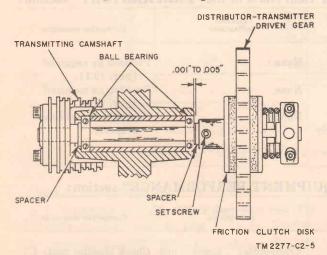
(Added) Transmitting camshaft end play adjustment. c. Adjustment. Loosen the setscrews in the friction clutch disk. While holding the transmitter camshaft towards the casting and against the ball bearing, slide the friction clutch disk and spacer against the ball bearing. Be certain the setscrews are properly positioned over the flats on the shaft. Tighten the setscrews.
